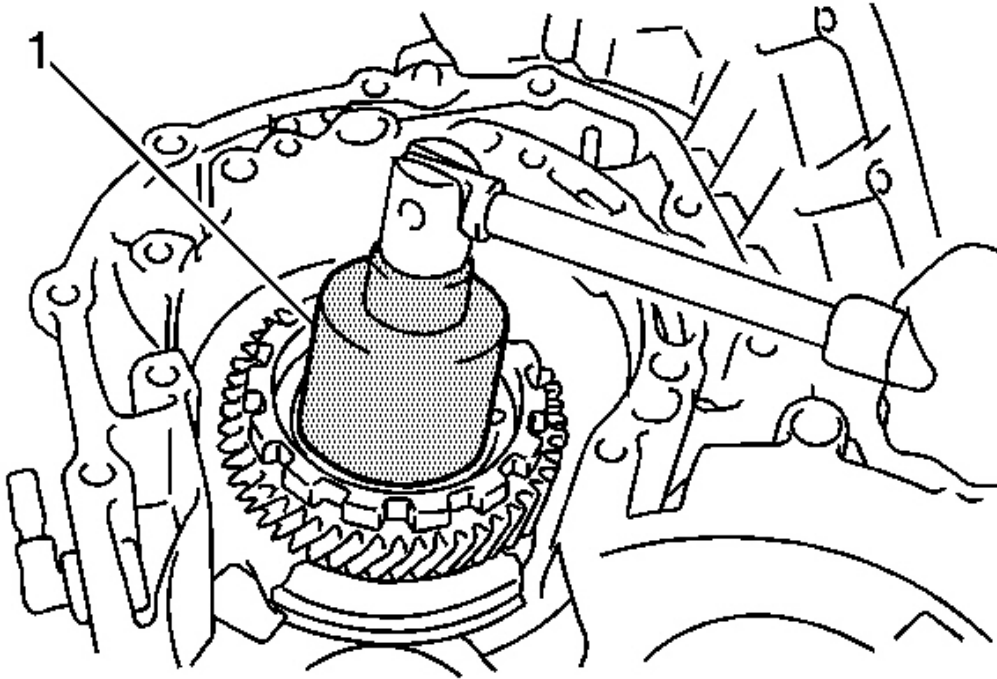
Removing Planetary Ring Gear Nut Using DT 46472
